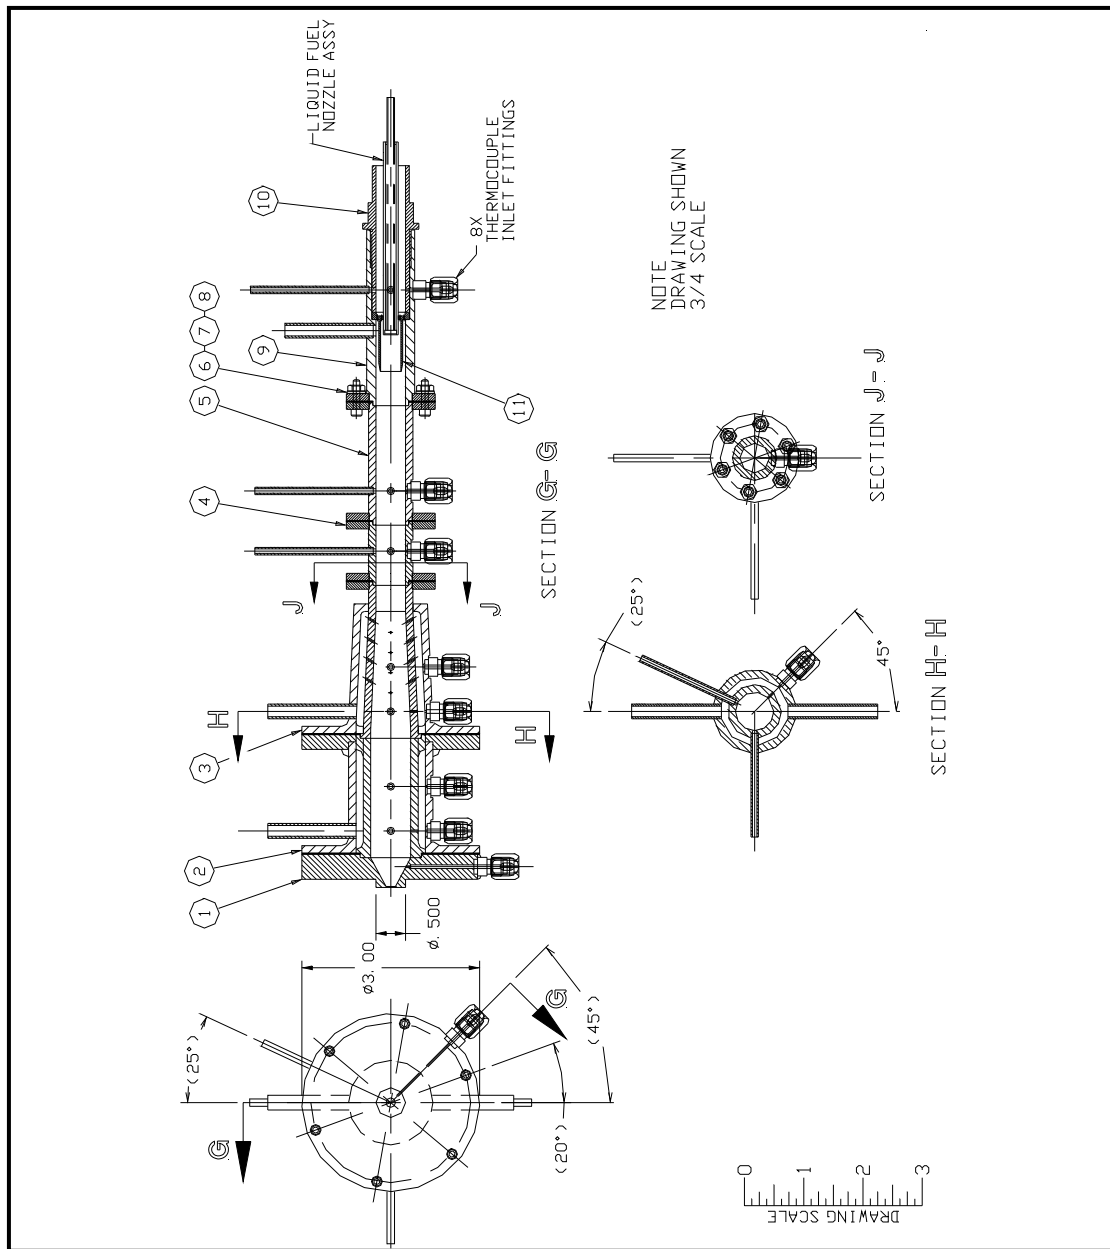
CAD Drawing of the SPP Prototype – Overall Assembly of the SPP
